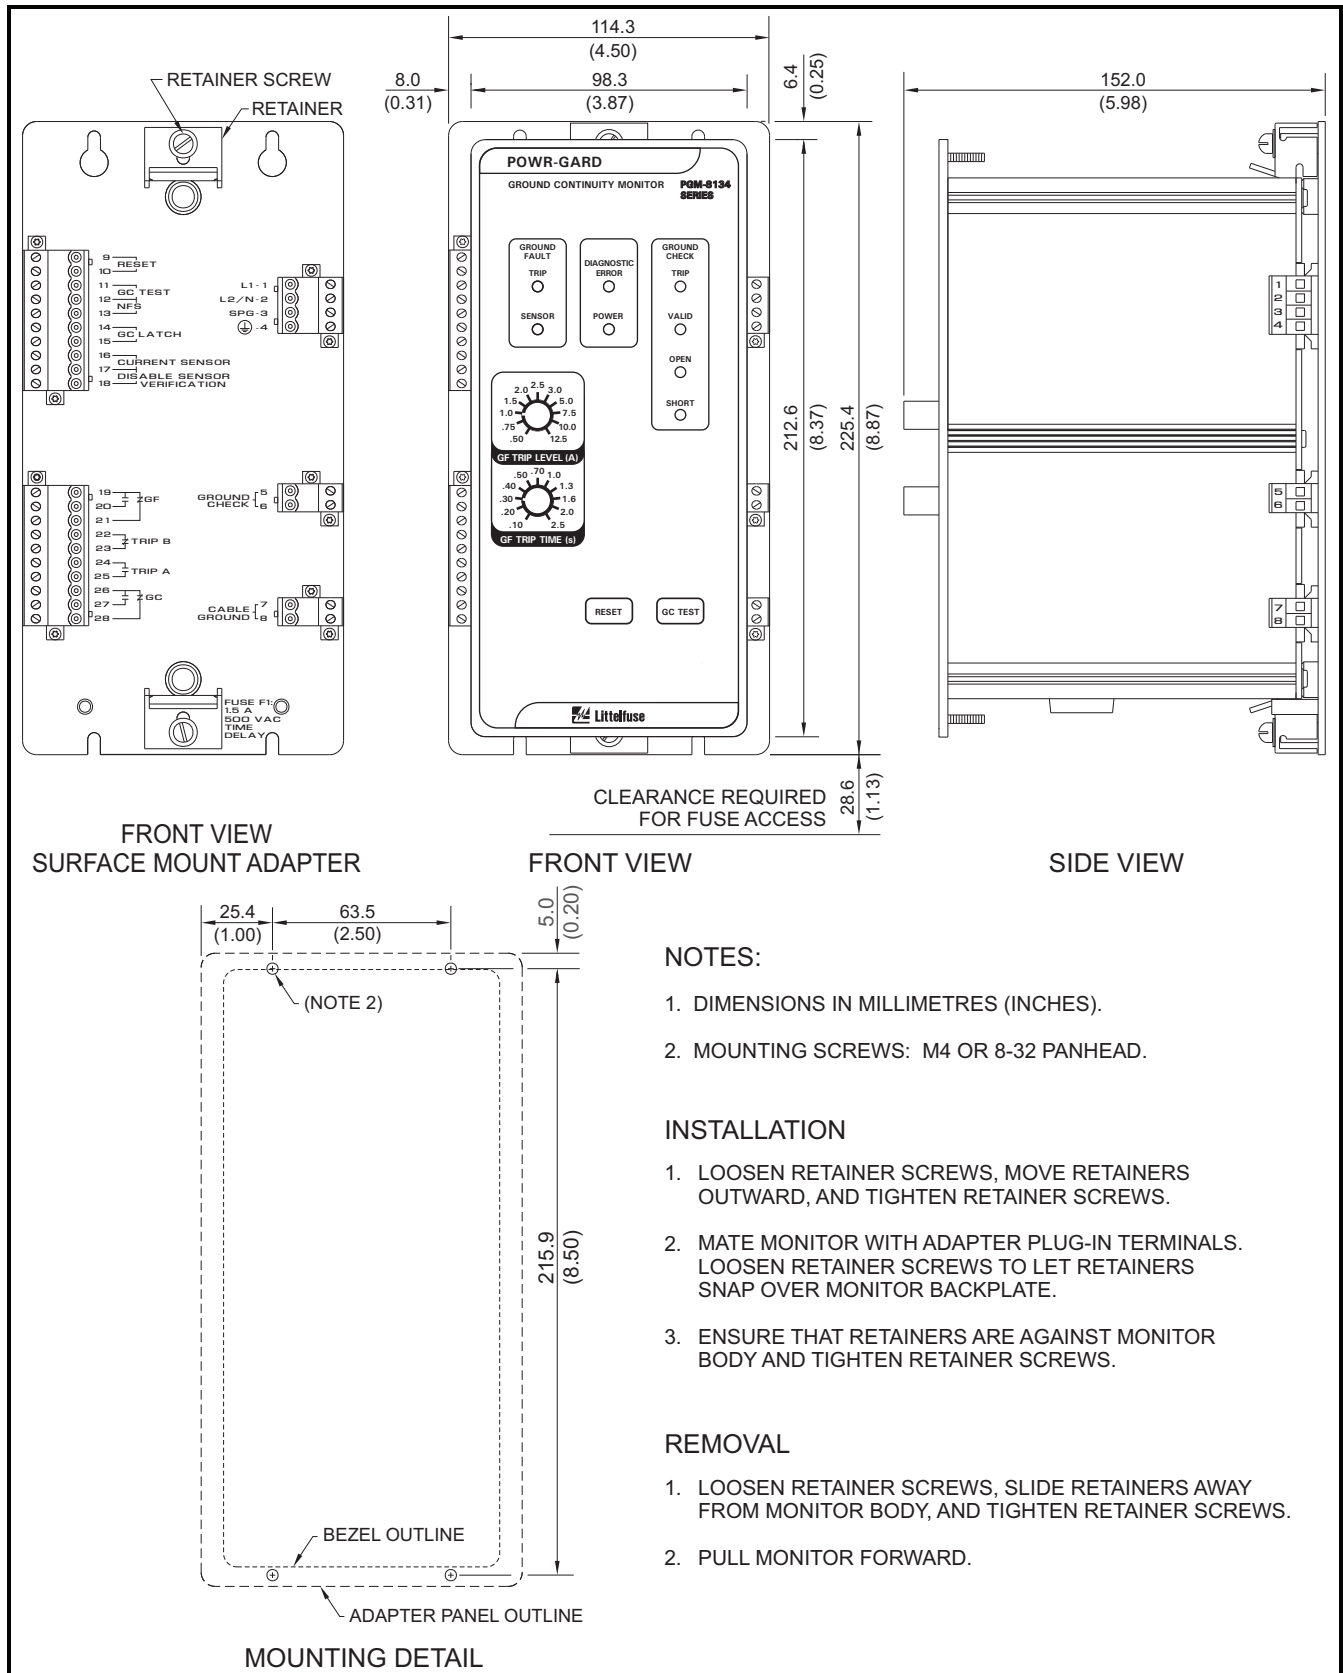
PGM-8134 Outline and Surface-Mounting Details.
